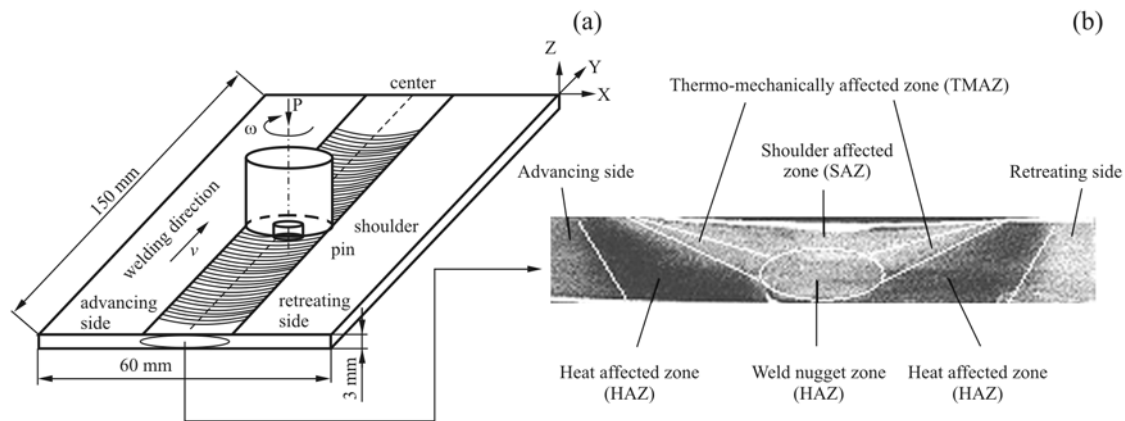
The schematic of the friction stir welding (FSW) and cross section of FS weld: (a) the schematic of FSW; (b) metallographic image of cross section of FS weld.
